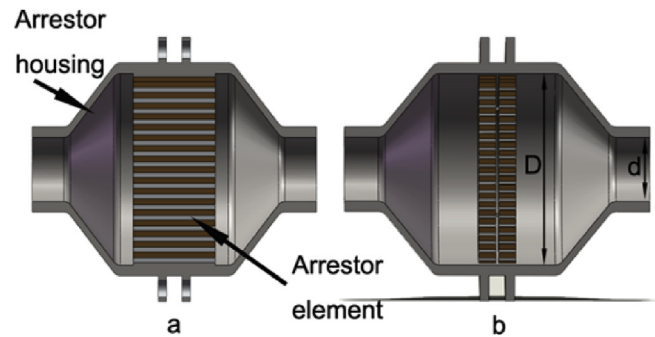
Sketches of two types of flame arrestors. a: Test type A flame arrestor with one crimped metal ribbon element; b: Test type B flame arrestor with two crimped metal ribbon elements.
